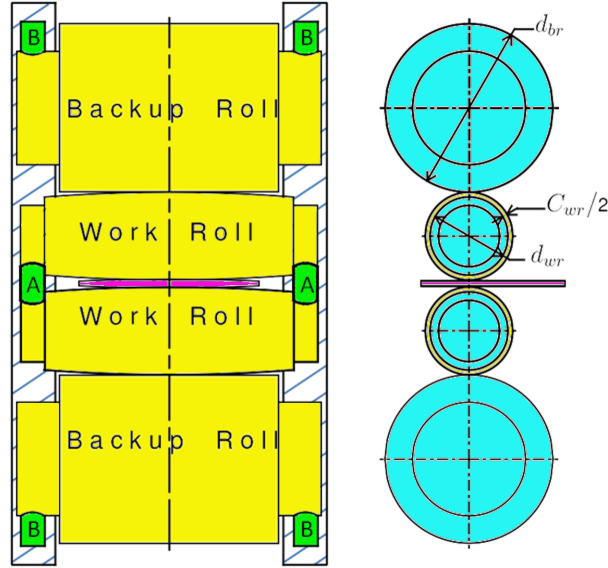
Unloaded mill stand cut away and side view the top roll stack (work and backup rolls) and strip.
